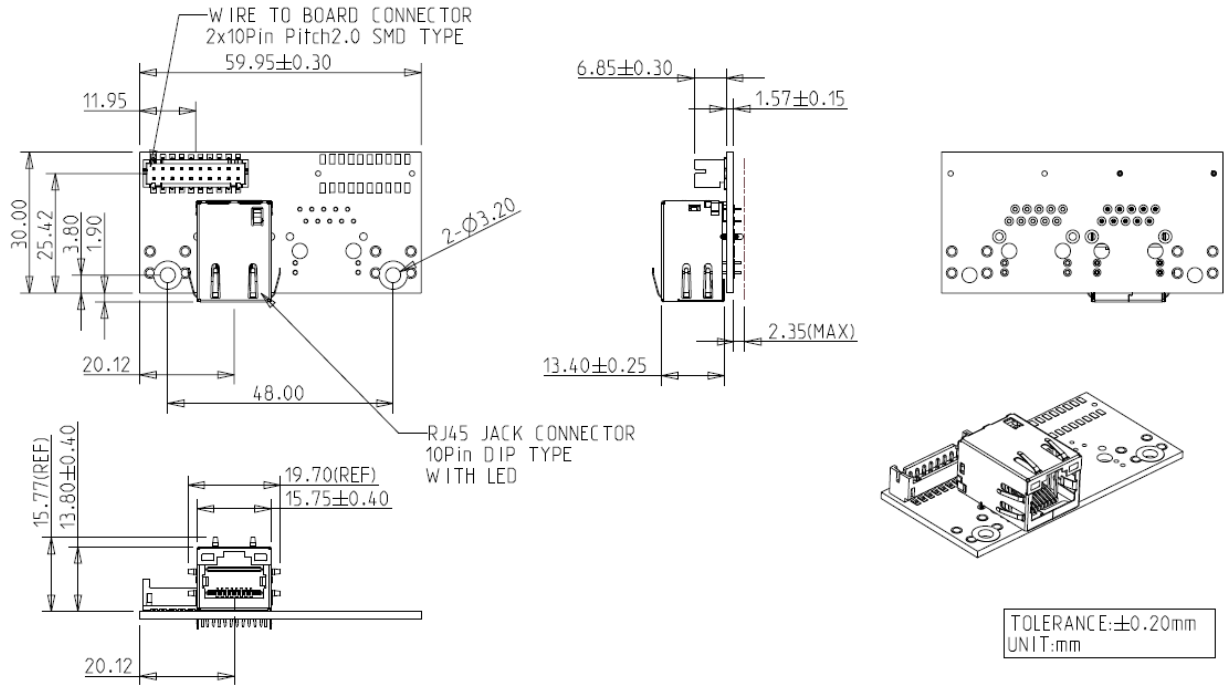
Bracket Daughter Board Drawing (EMPL-G1S1-C2/V2/W2)
